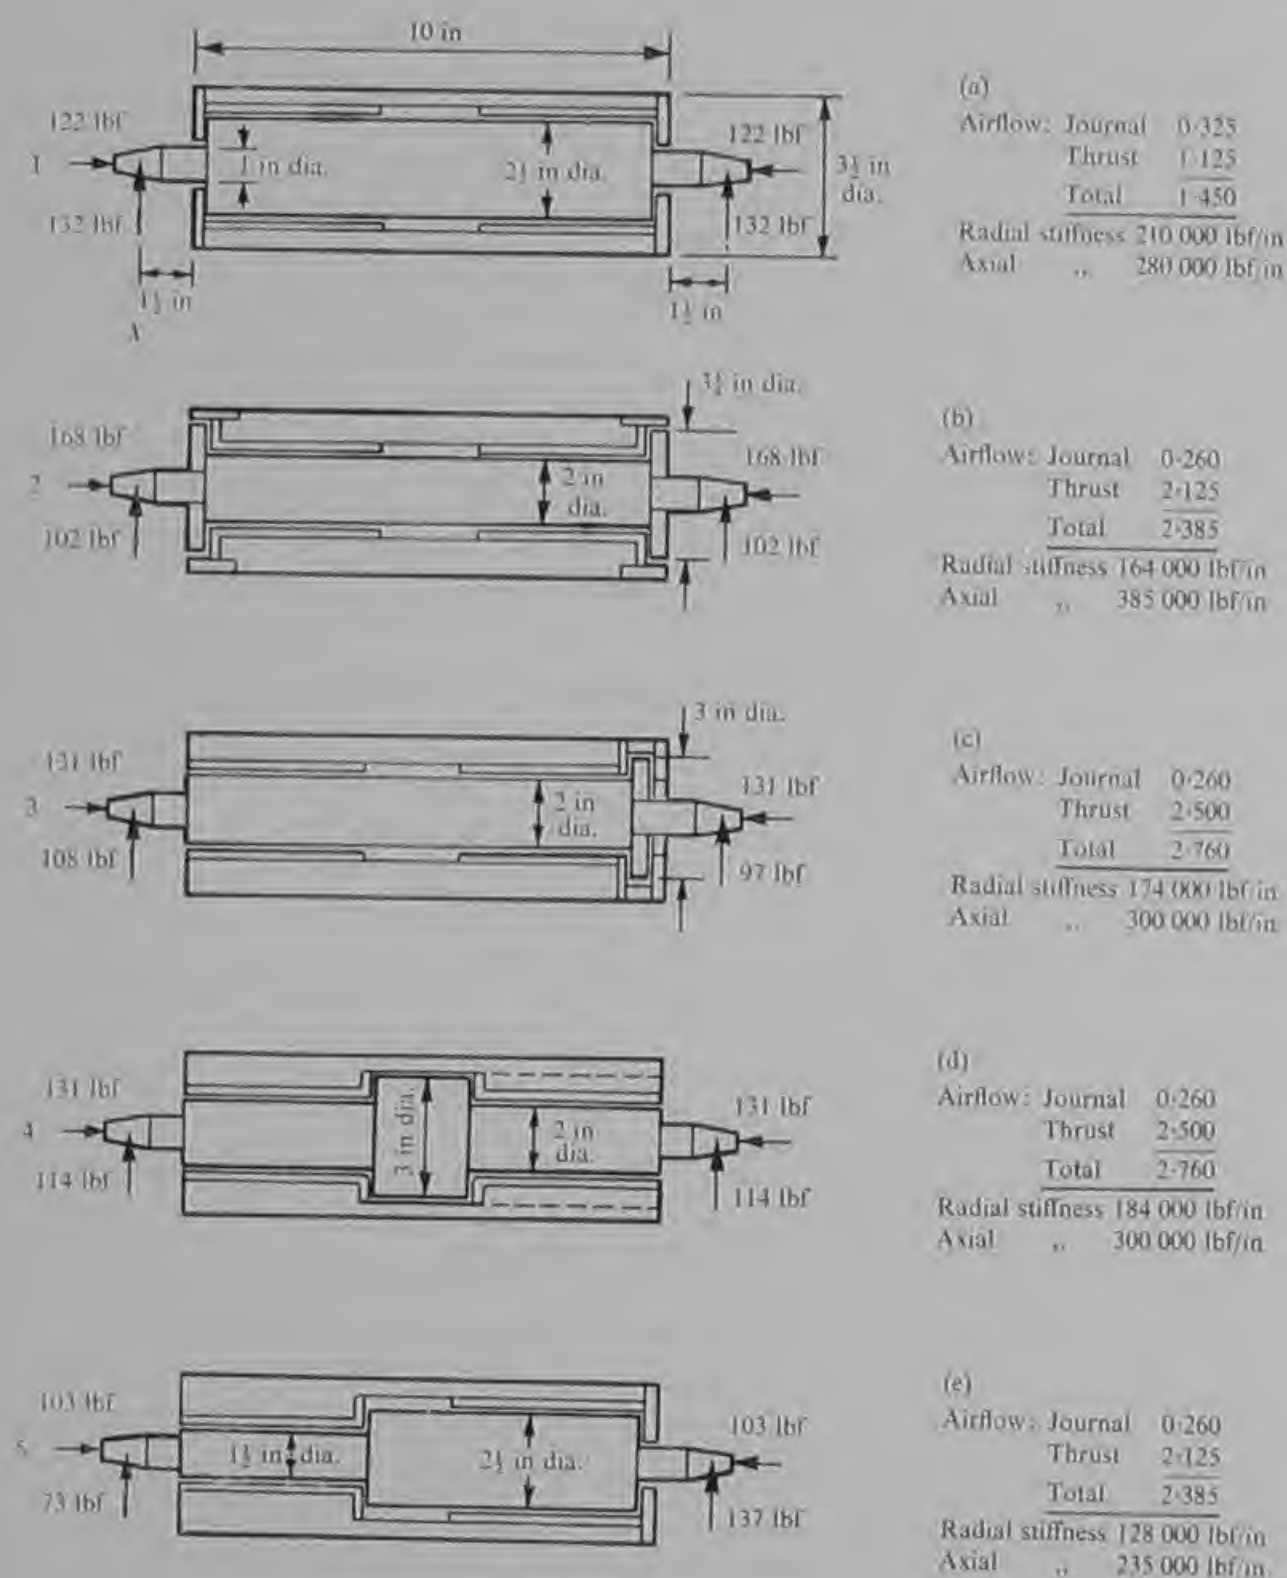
Factors limiting the design of a machine tool spindle with aerostatic bearings
